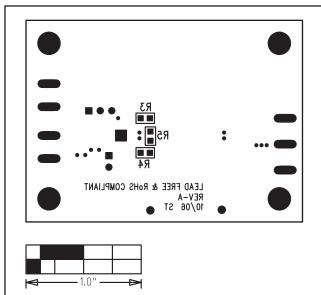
MAX256 EV Kit Component Placement Guide— Solder Side
